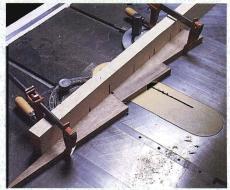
By clamping the cutting guides to your miter gauge fence as shown, you can cut perfect tapered dadoes in your layout tool handles.
